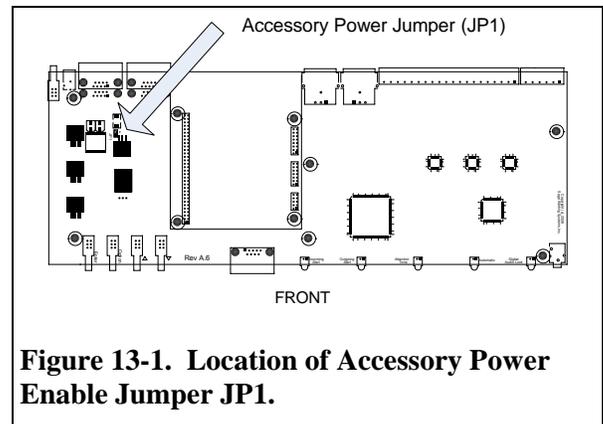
Location of Accessory Power Enable Jumper JP1.
